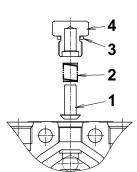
Check valve section (Blade, Swing, Arm, Boom Swing, Boom and Bucket Sections)
